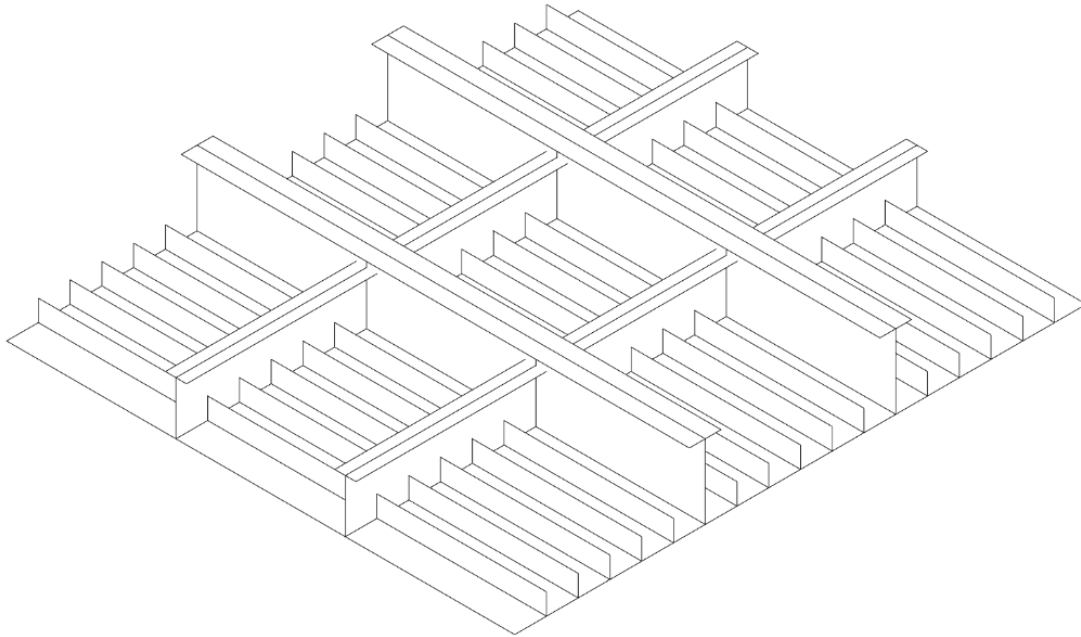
Illustrative drawing of the designed PC7 panel structure.
